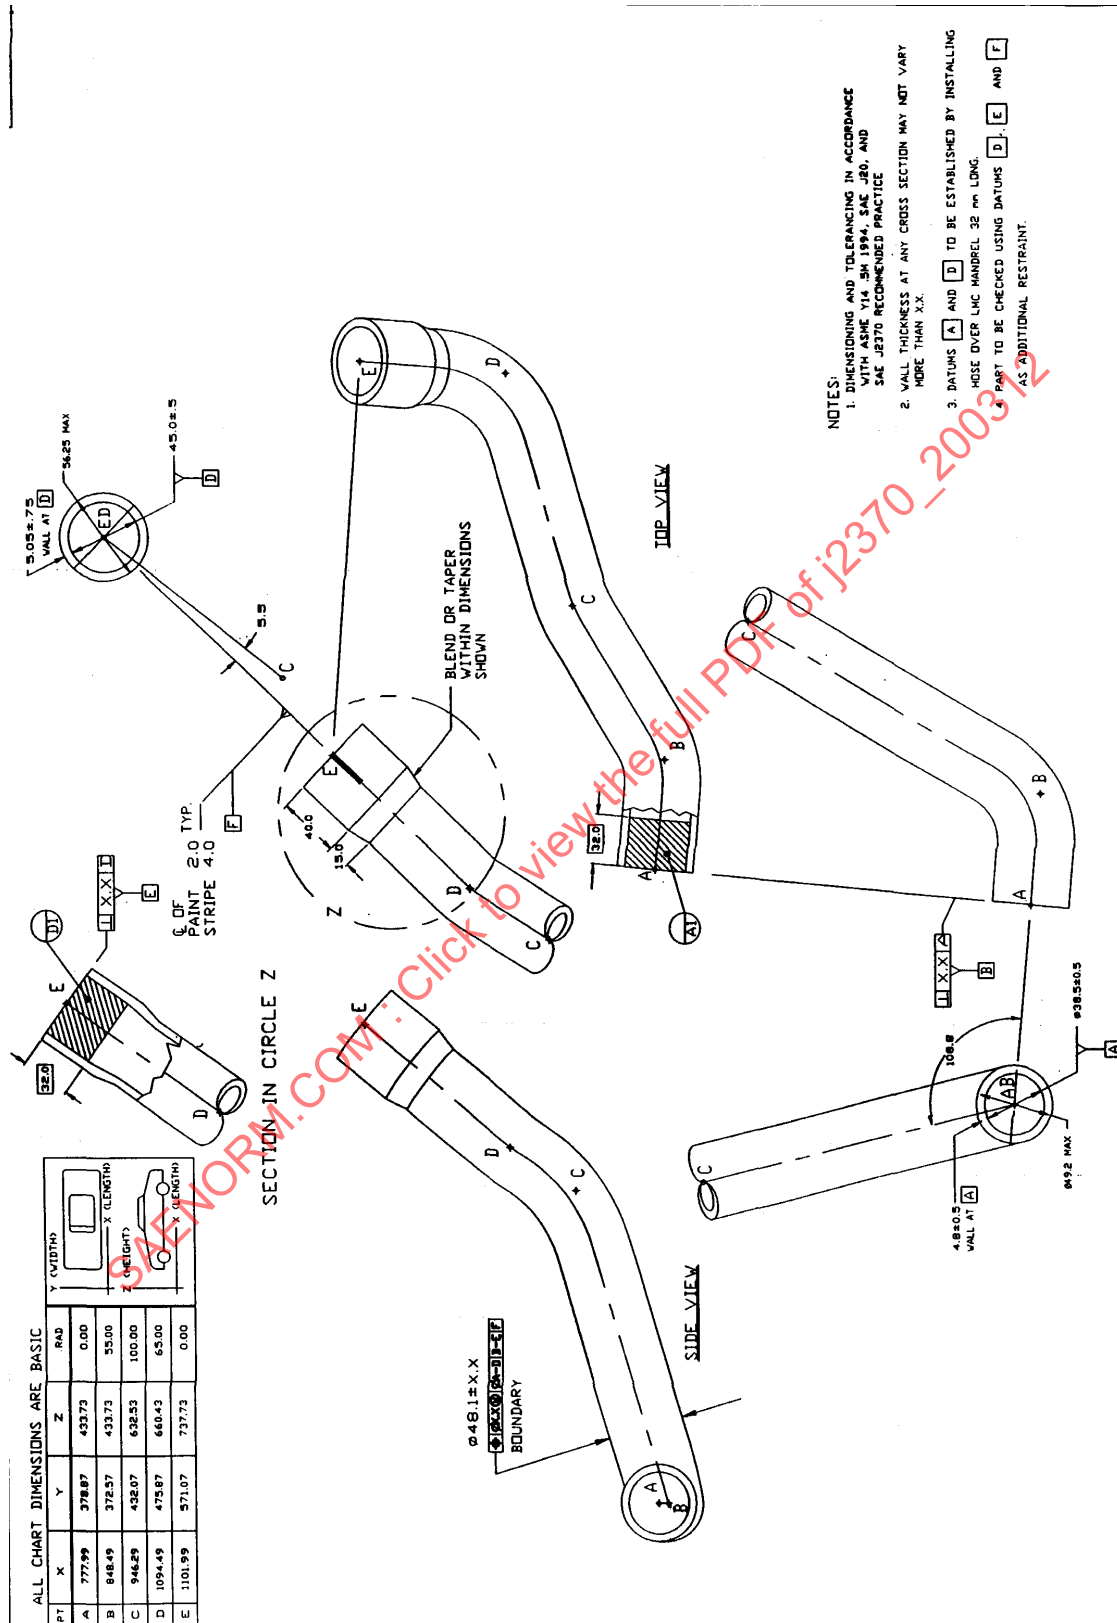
DRAWING WITH DATUM FEATURES AND
